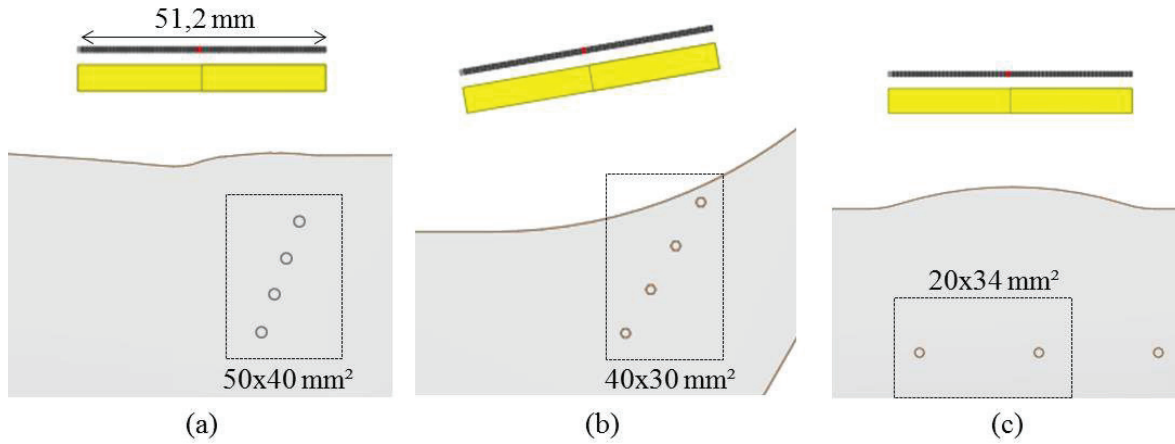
Steel mock-ups with different surface geometries: irregular geometry of a leveled weld (a), concave surface representative of a nozzle junction (b), convex surface of a butt weld (c). In each case, holes of 2 mm diameter are located under the complex surface, and the TFM area (location and dimensions) is described.
